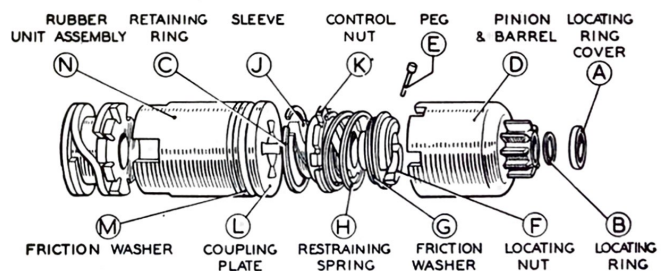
Exploded view of Starter Motor Drive Assembly.
